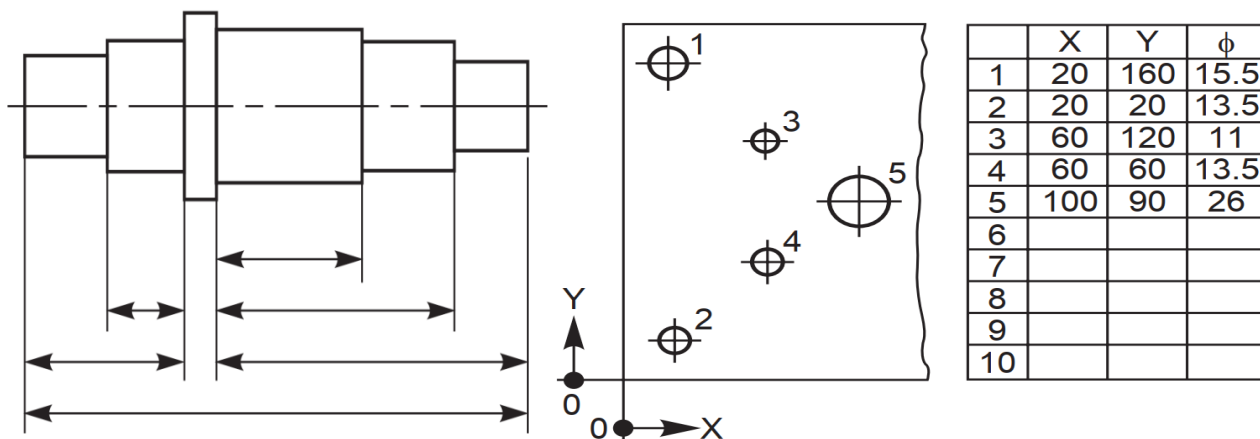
Combined dimensioning and Co-ordinate dimensioning
